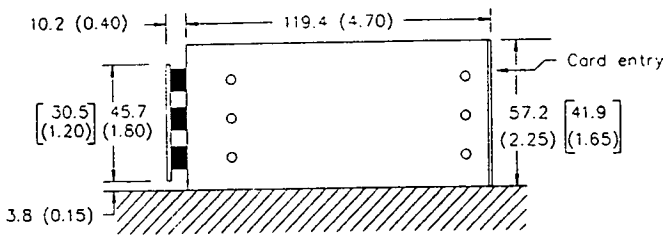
Horizontal 2- and 3-slot card cage dimensions.
